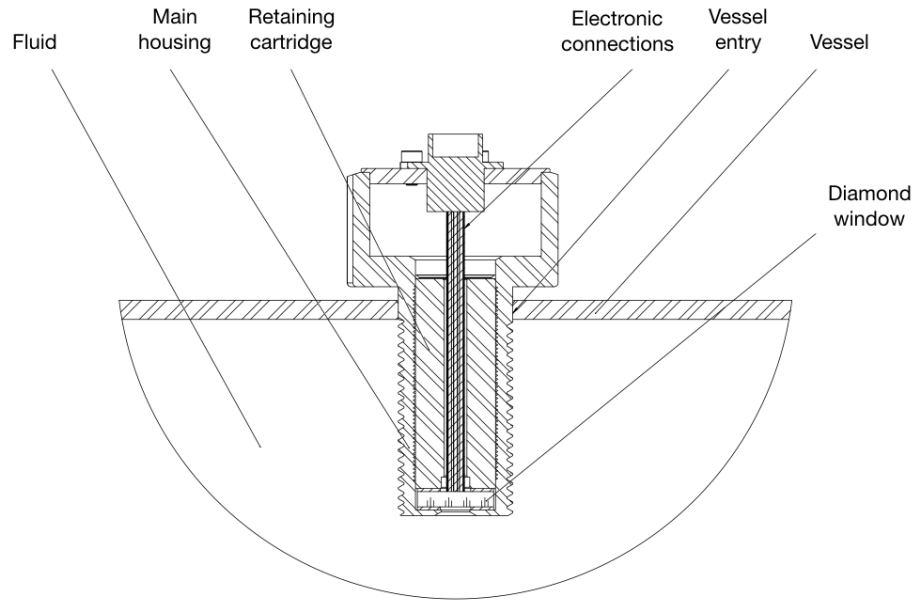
A CAD design schematic for the proposed packaging of diamond sensors to be deployed in extreme environments.
